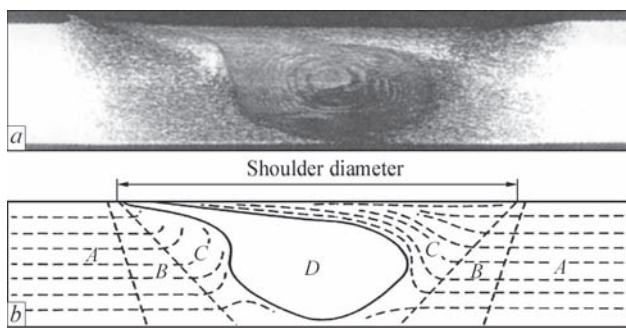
Transverse macrosection of the welded joint, produced by FSW (a) and respective schematic image of its characteristic zones
